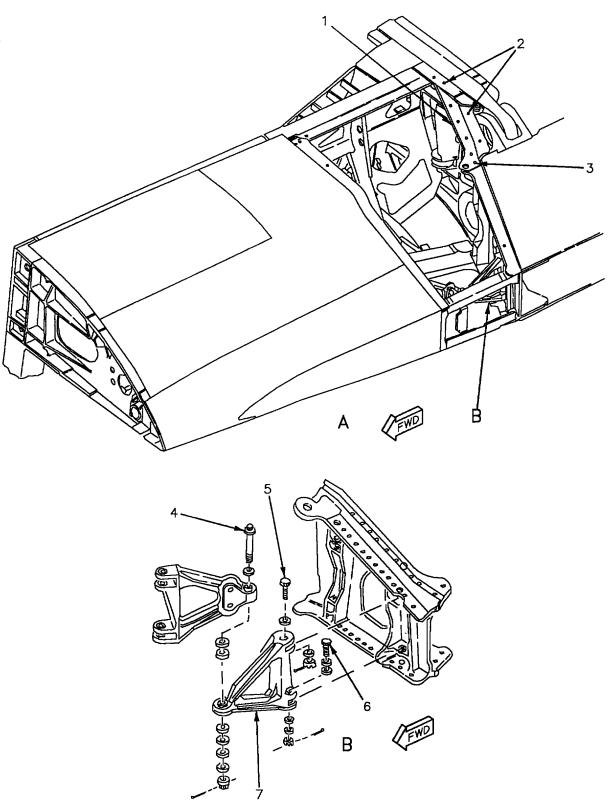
Inner Wing Removal and Installation Attachments (Sheet 2)
